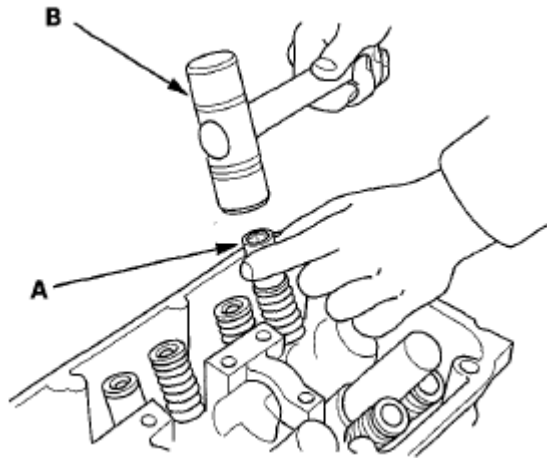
Tapping Spring Retainer Using Socket & Plastic Mallet
